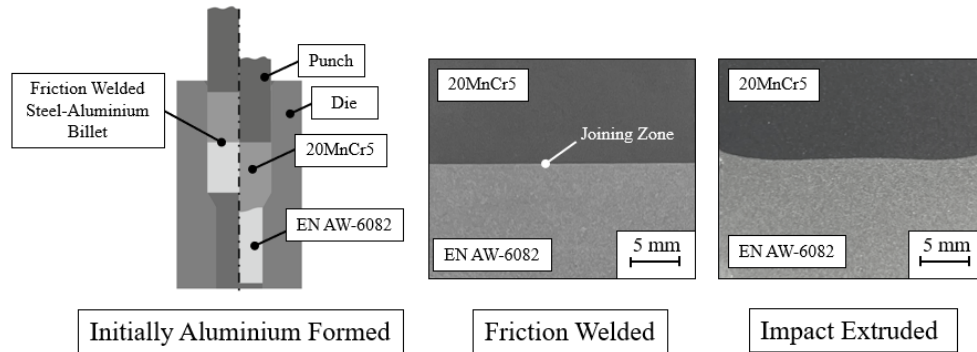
Joining zone after friction welding and forward rod extrusion.
